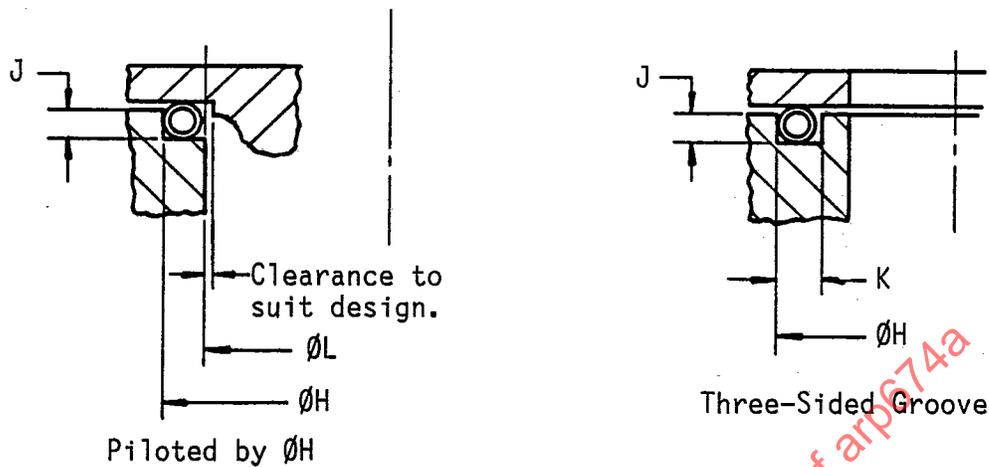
Type 2, Three-Plane Contact Grooves
